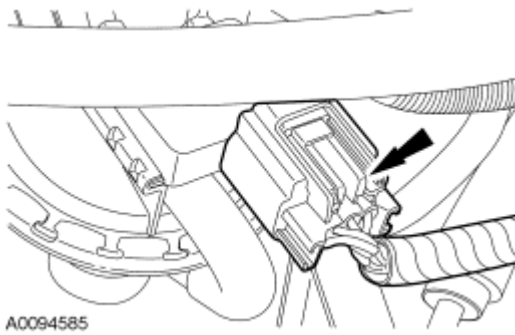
Locating Exhaust Gas Recirculation (EGR) System Module Electrical Connector
